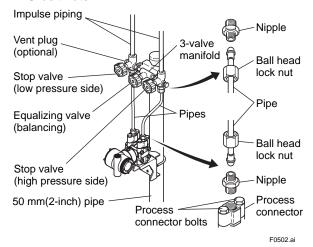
3-Valve Manifold (Pipe-Mounting Type)
